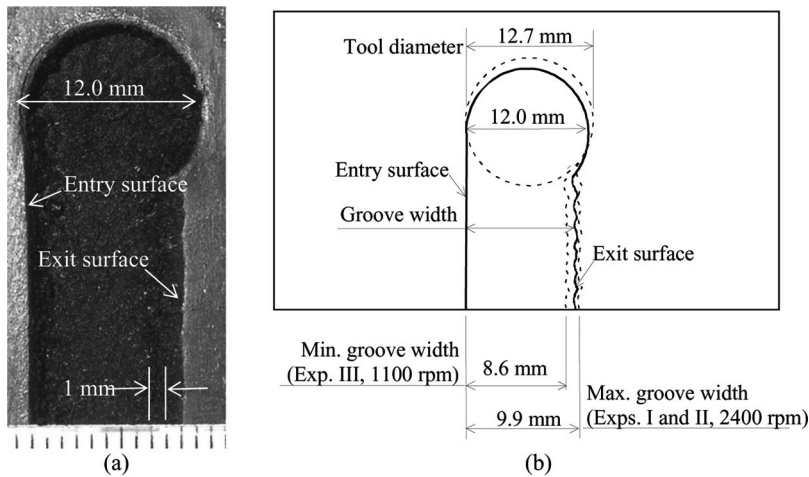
Top view of the groove machined in Exp. I at 2400 rpm: (a) picture of the hole generated by retracting end milling tool, and (b) relative size of the tool, hole, and maximum and minimum groove width.
